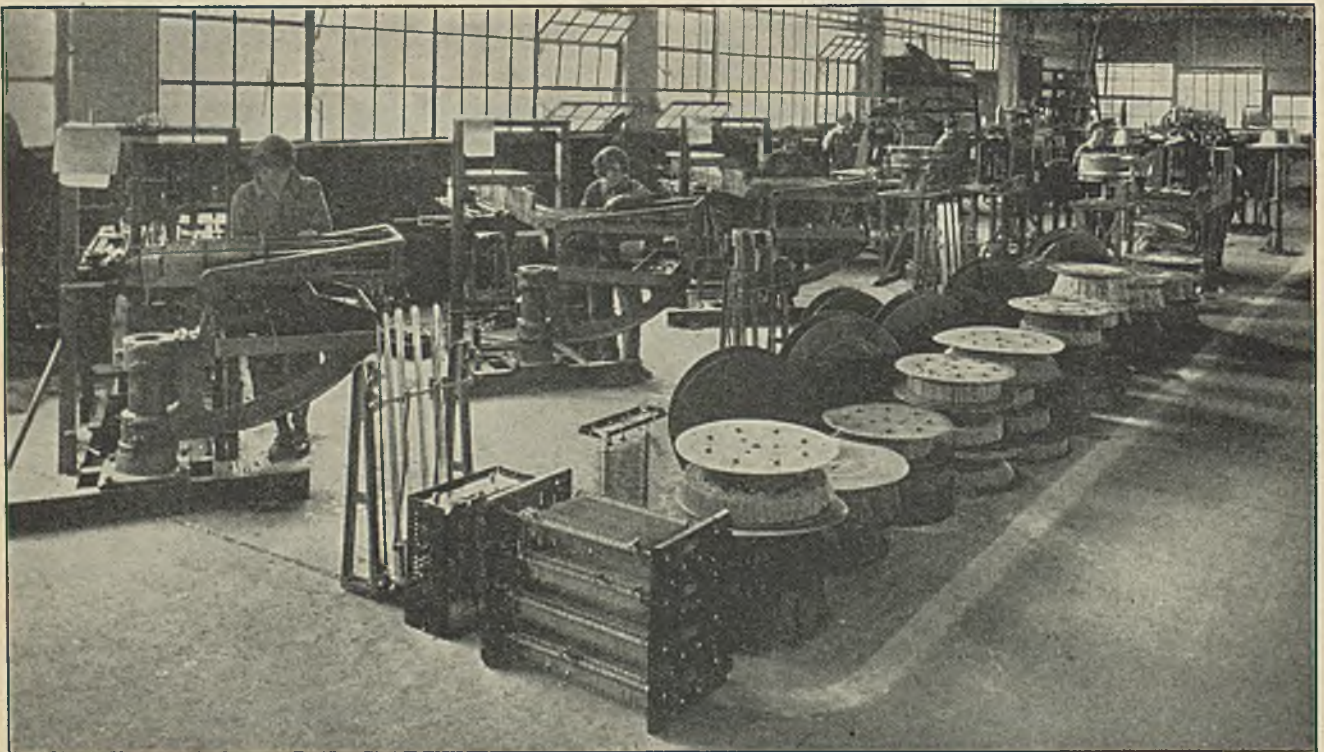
Winding and Assembling Unbreakable Resistances.
